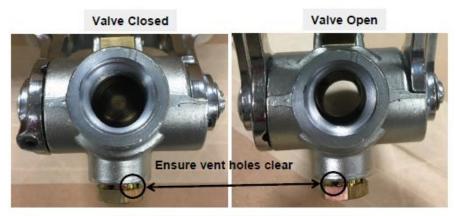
Horn-Valve View Showing Burst Disc Vent Holes
